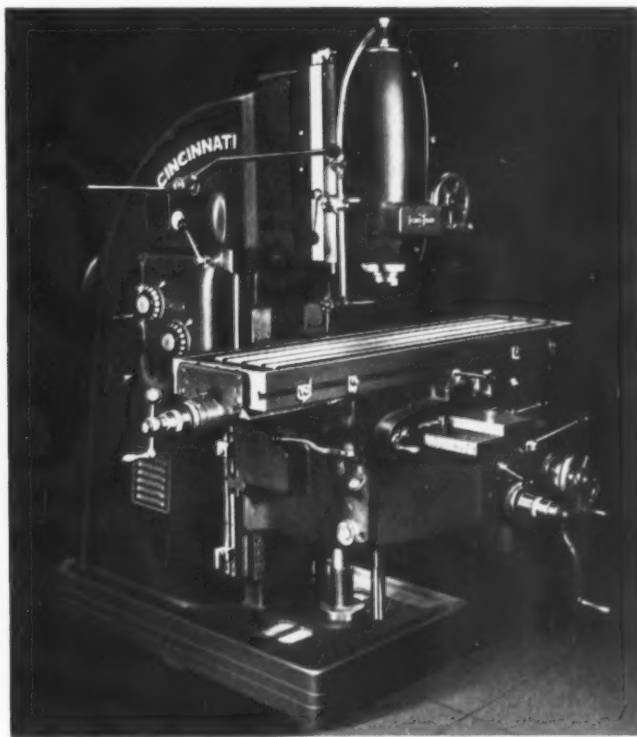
Cincinnati No. 3 Vertical High-speed Dial Type Milling Machine
